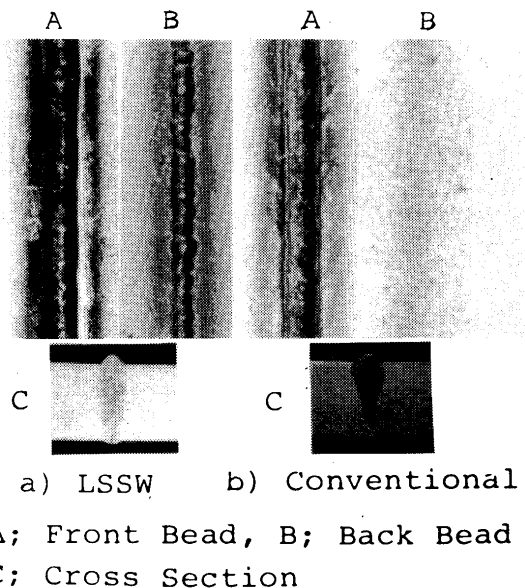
Comparison of bead appearance and cross section between LSSW and conventional laser welding under the same welding conditions.
